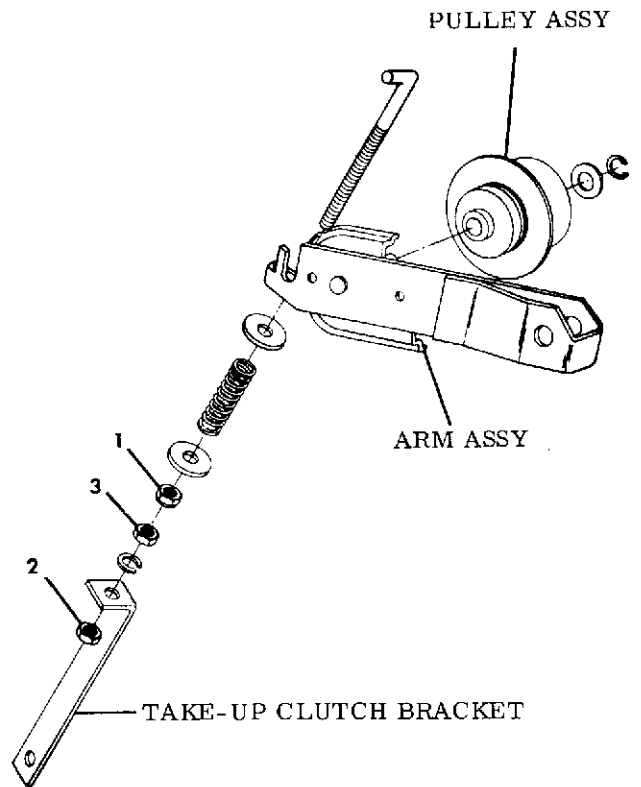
TAKE-UP CLUTCH ARM COMPLETE
